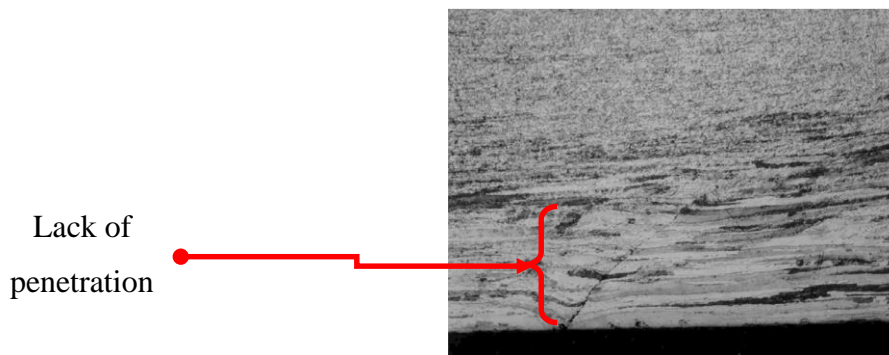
Welding with a lack of penetration defect. ([Mishra and Mahoney, 2007](#))
